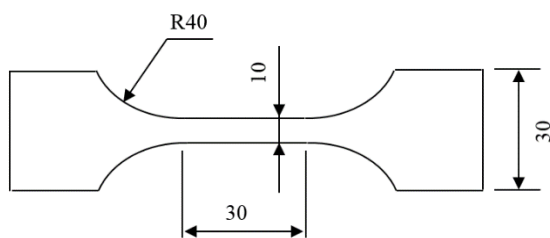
Dimensions of fatigue test sample according to ASTM E466
